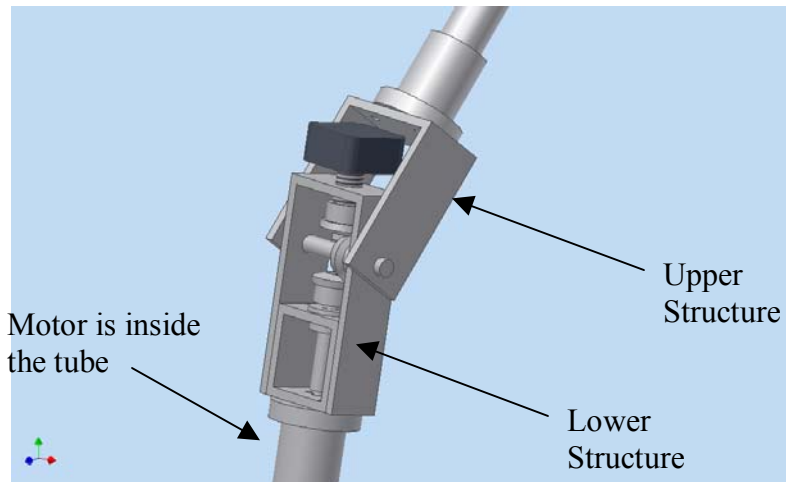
Rendering of the design, complete with pieces that join the leg links to the joint.
